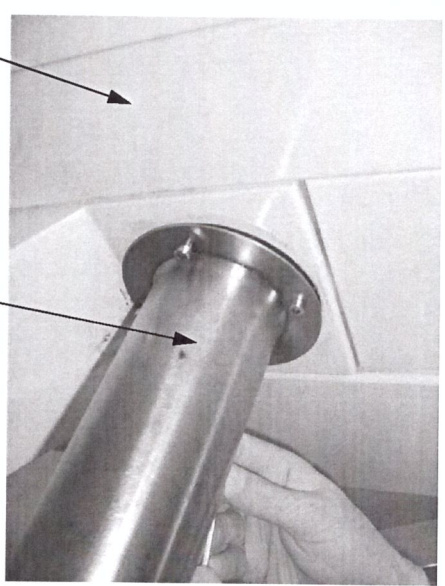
Connecting Straight Pipe to Exhaust Flange on Baccini Laser Tool
